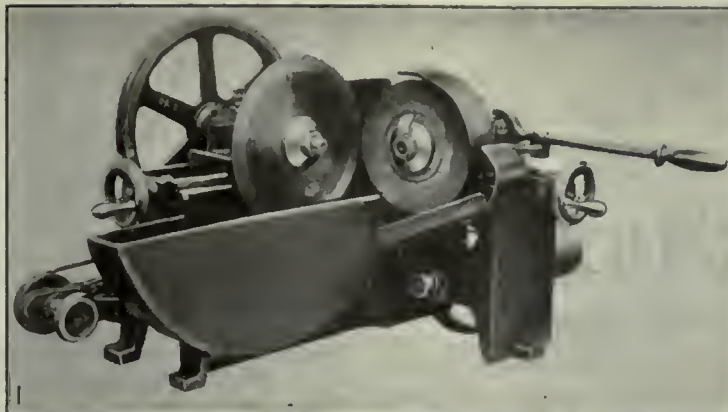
FRONT VIEW OF BEVEL GRINDER. FIG. 2—BACK VIEW OF BEVEL GRINDER. FIG. 3—AUTOMATIC MILLING SAW SHARPENER.
